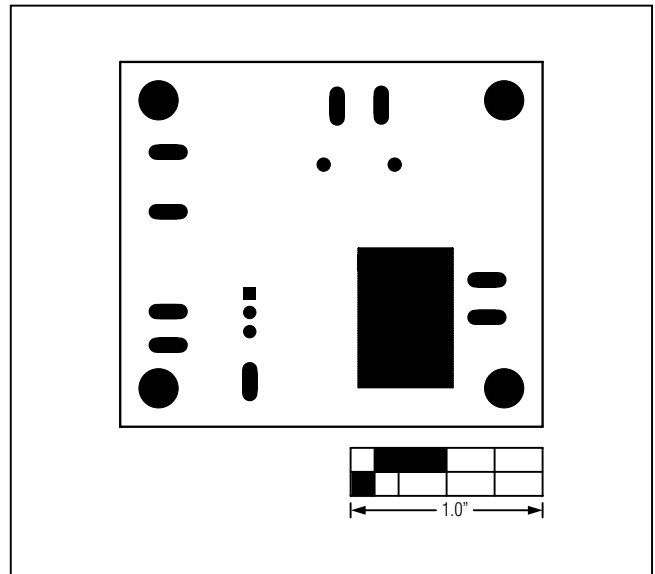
MAX17501H EV Kit PCB Layout—Bottom Solder Mask
